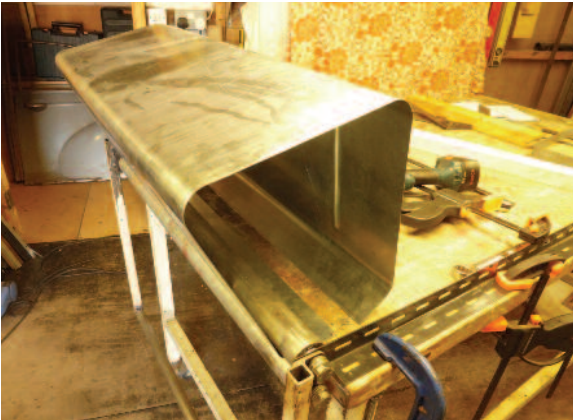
Second bend showing the piece of wood used to clamp the sheet.
